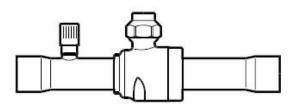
Schematic Diagram for indoor unit connection pipe side ball valve
